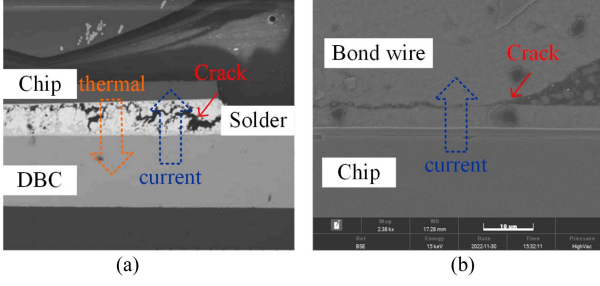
SEM pictures of cracks in the chip solder layer and aluminum bond wire. (a) Chip solder layer. (b) Aluminum bond wire.
